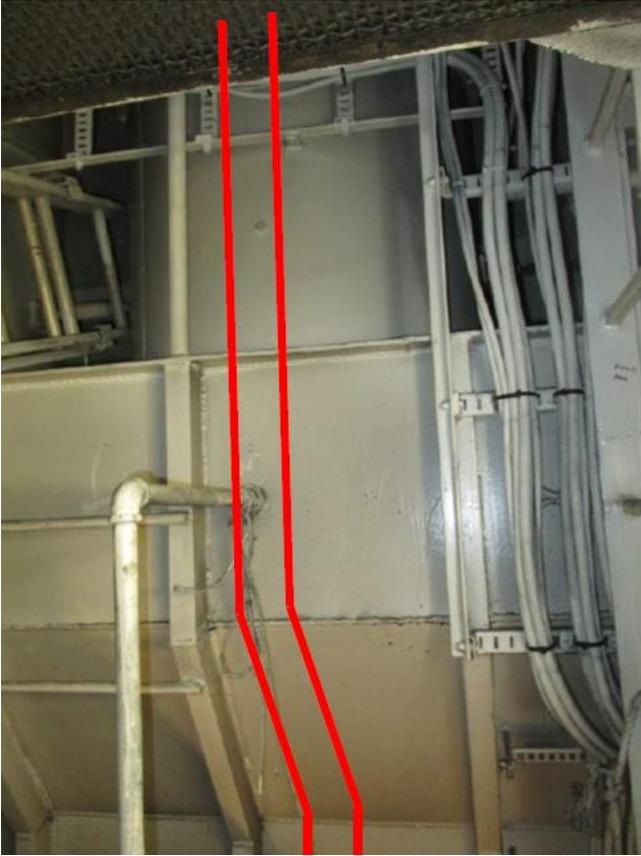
Routing of pipe in engine room, inboard of hoist rail port side looking forward
